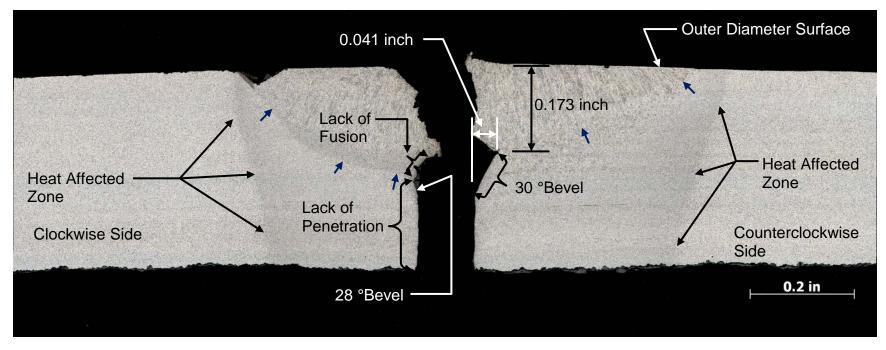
Etched metallographic mating faces cross section of the longitudinal seam in pup 2 taken 9 inch south of girth weld C3. Lineup in the longitudinal direction is within 0.05 inch. The microstructure of the weld was consistent with a fusion welding process along the outer diameter surface of the seam. Blue arrows – weld pool boundary along outer diameter surface seam.
